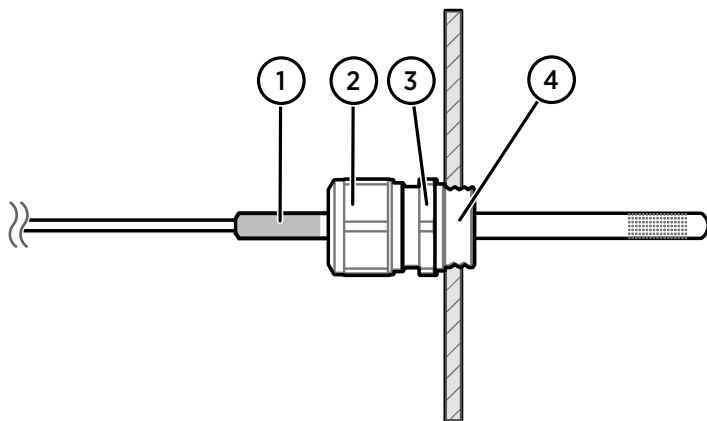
Installing HMP9 Probe Head Through a Cable Gland
